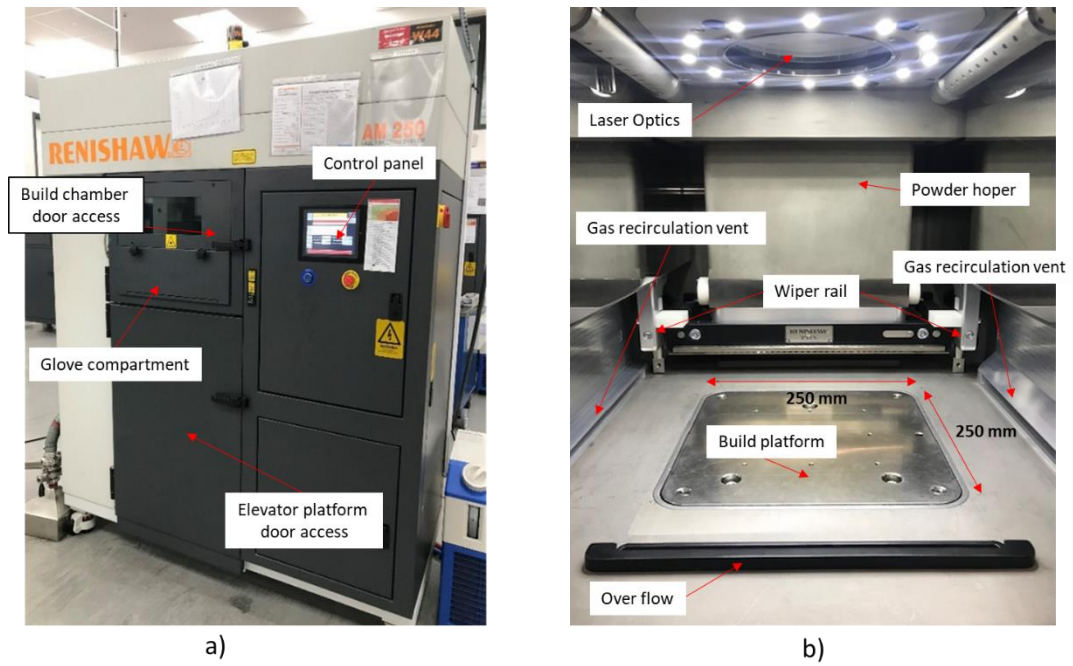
a) Renishaw AM250 L-PBF machine and b) inside view from the build chamber
